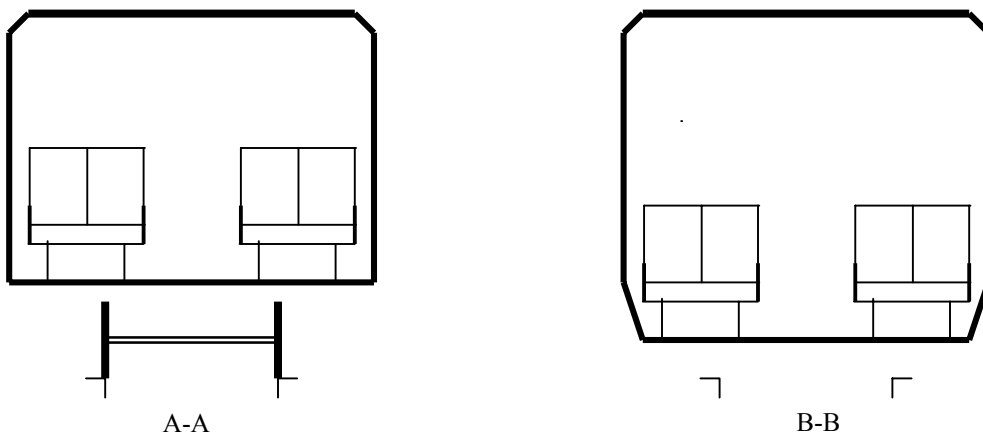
Design 1: New Entranceway for Low and High Level Platforms with Automatic Bridge Plate for ADA Access at High Platforms Only.
